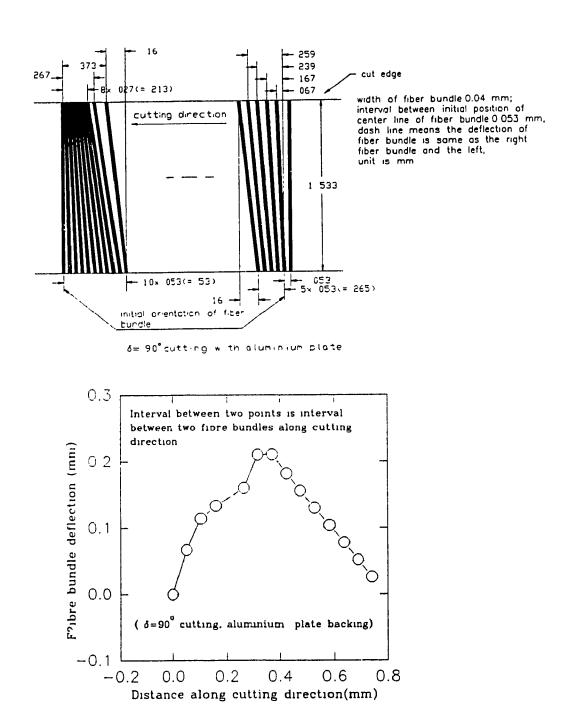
Fibre deflection after cutting of  $\delta$ =90° cutting with aluminium plate backing
